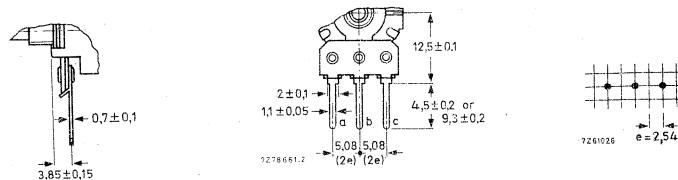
Long or short printed-wiring pins (single potentiometer).
